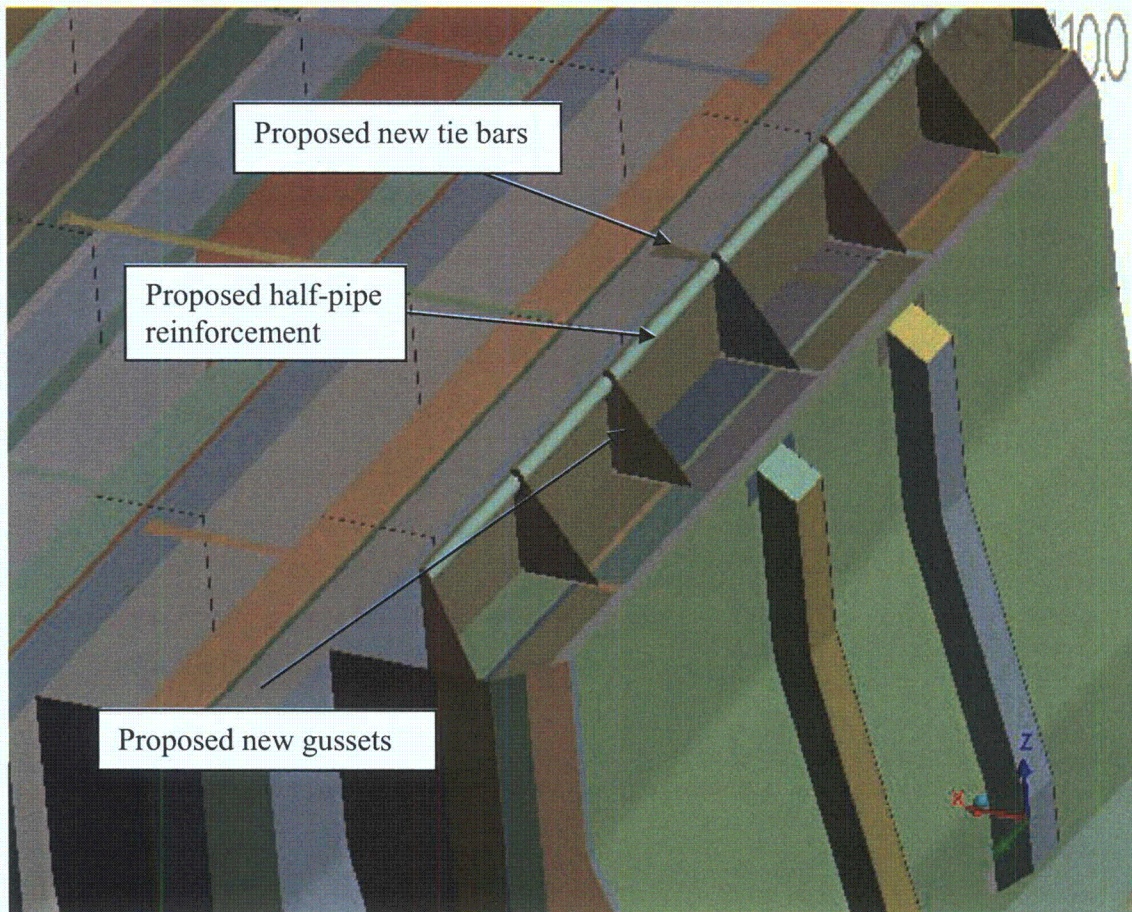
BFN2 modifications involving new tie bars, additional steam dam gussets and proposed half-pipe steam dam reinforcement to improve stress margins at EPU.
